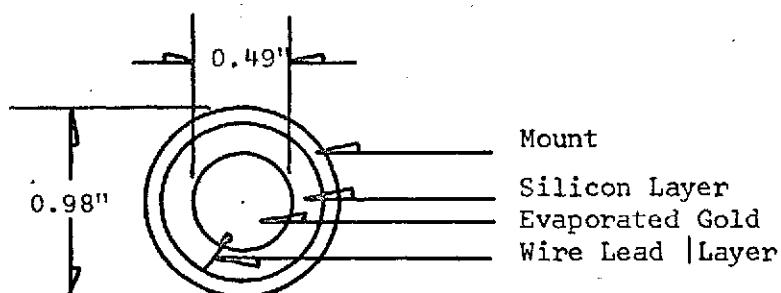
Dimensions of the Schottky Barrier Photodiodes
